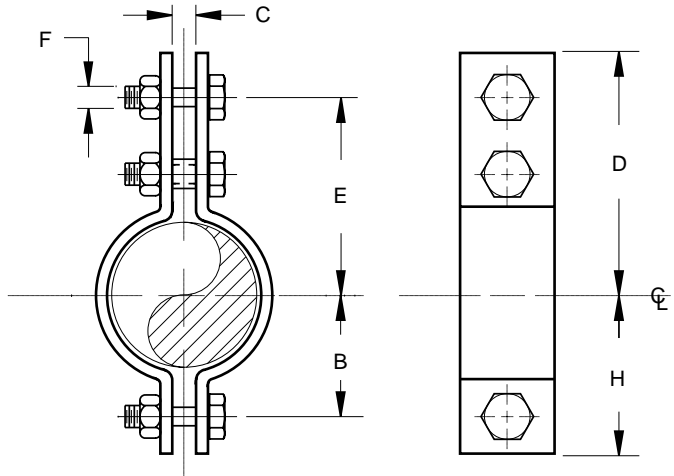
HEAVY DUTY THREE BOLT PIPE CLAMP
